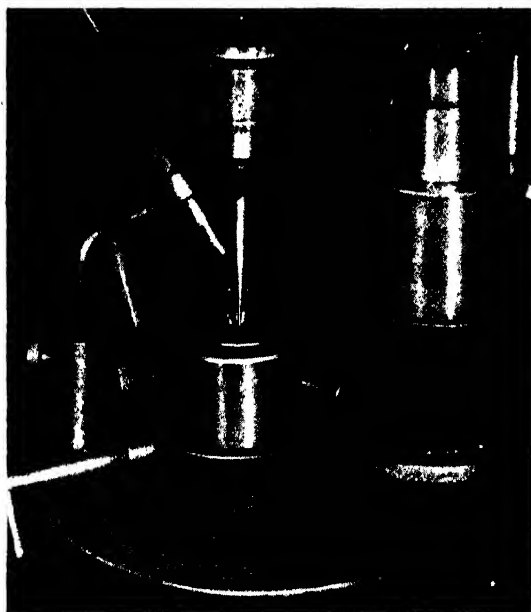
RIPPING OR REGRINDING A WIRE-DRAWING DIE
